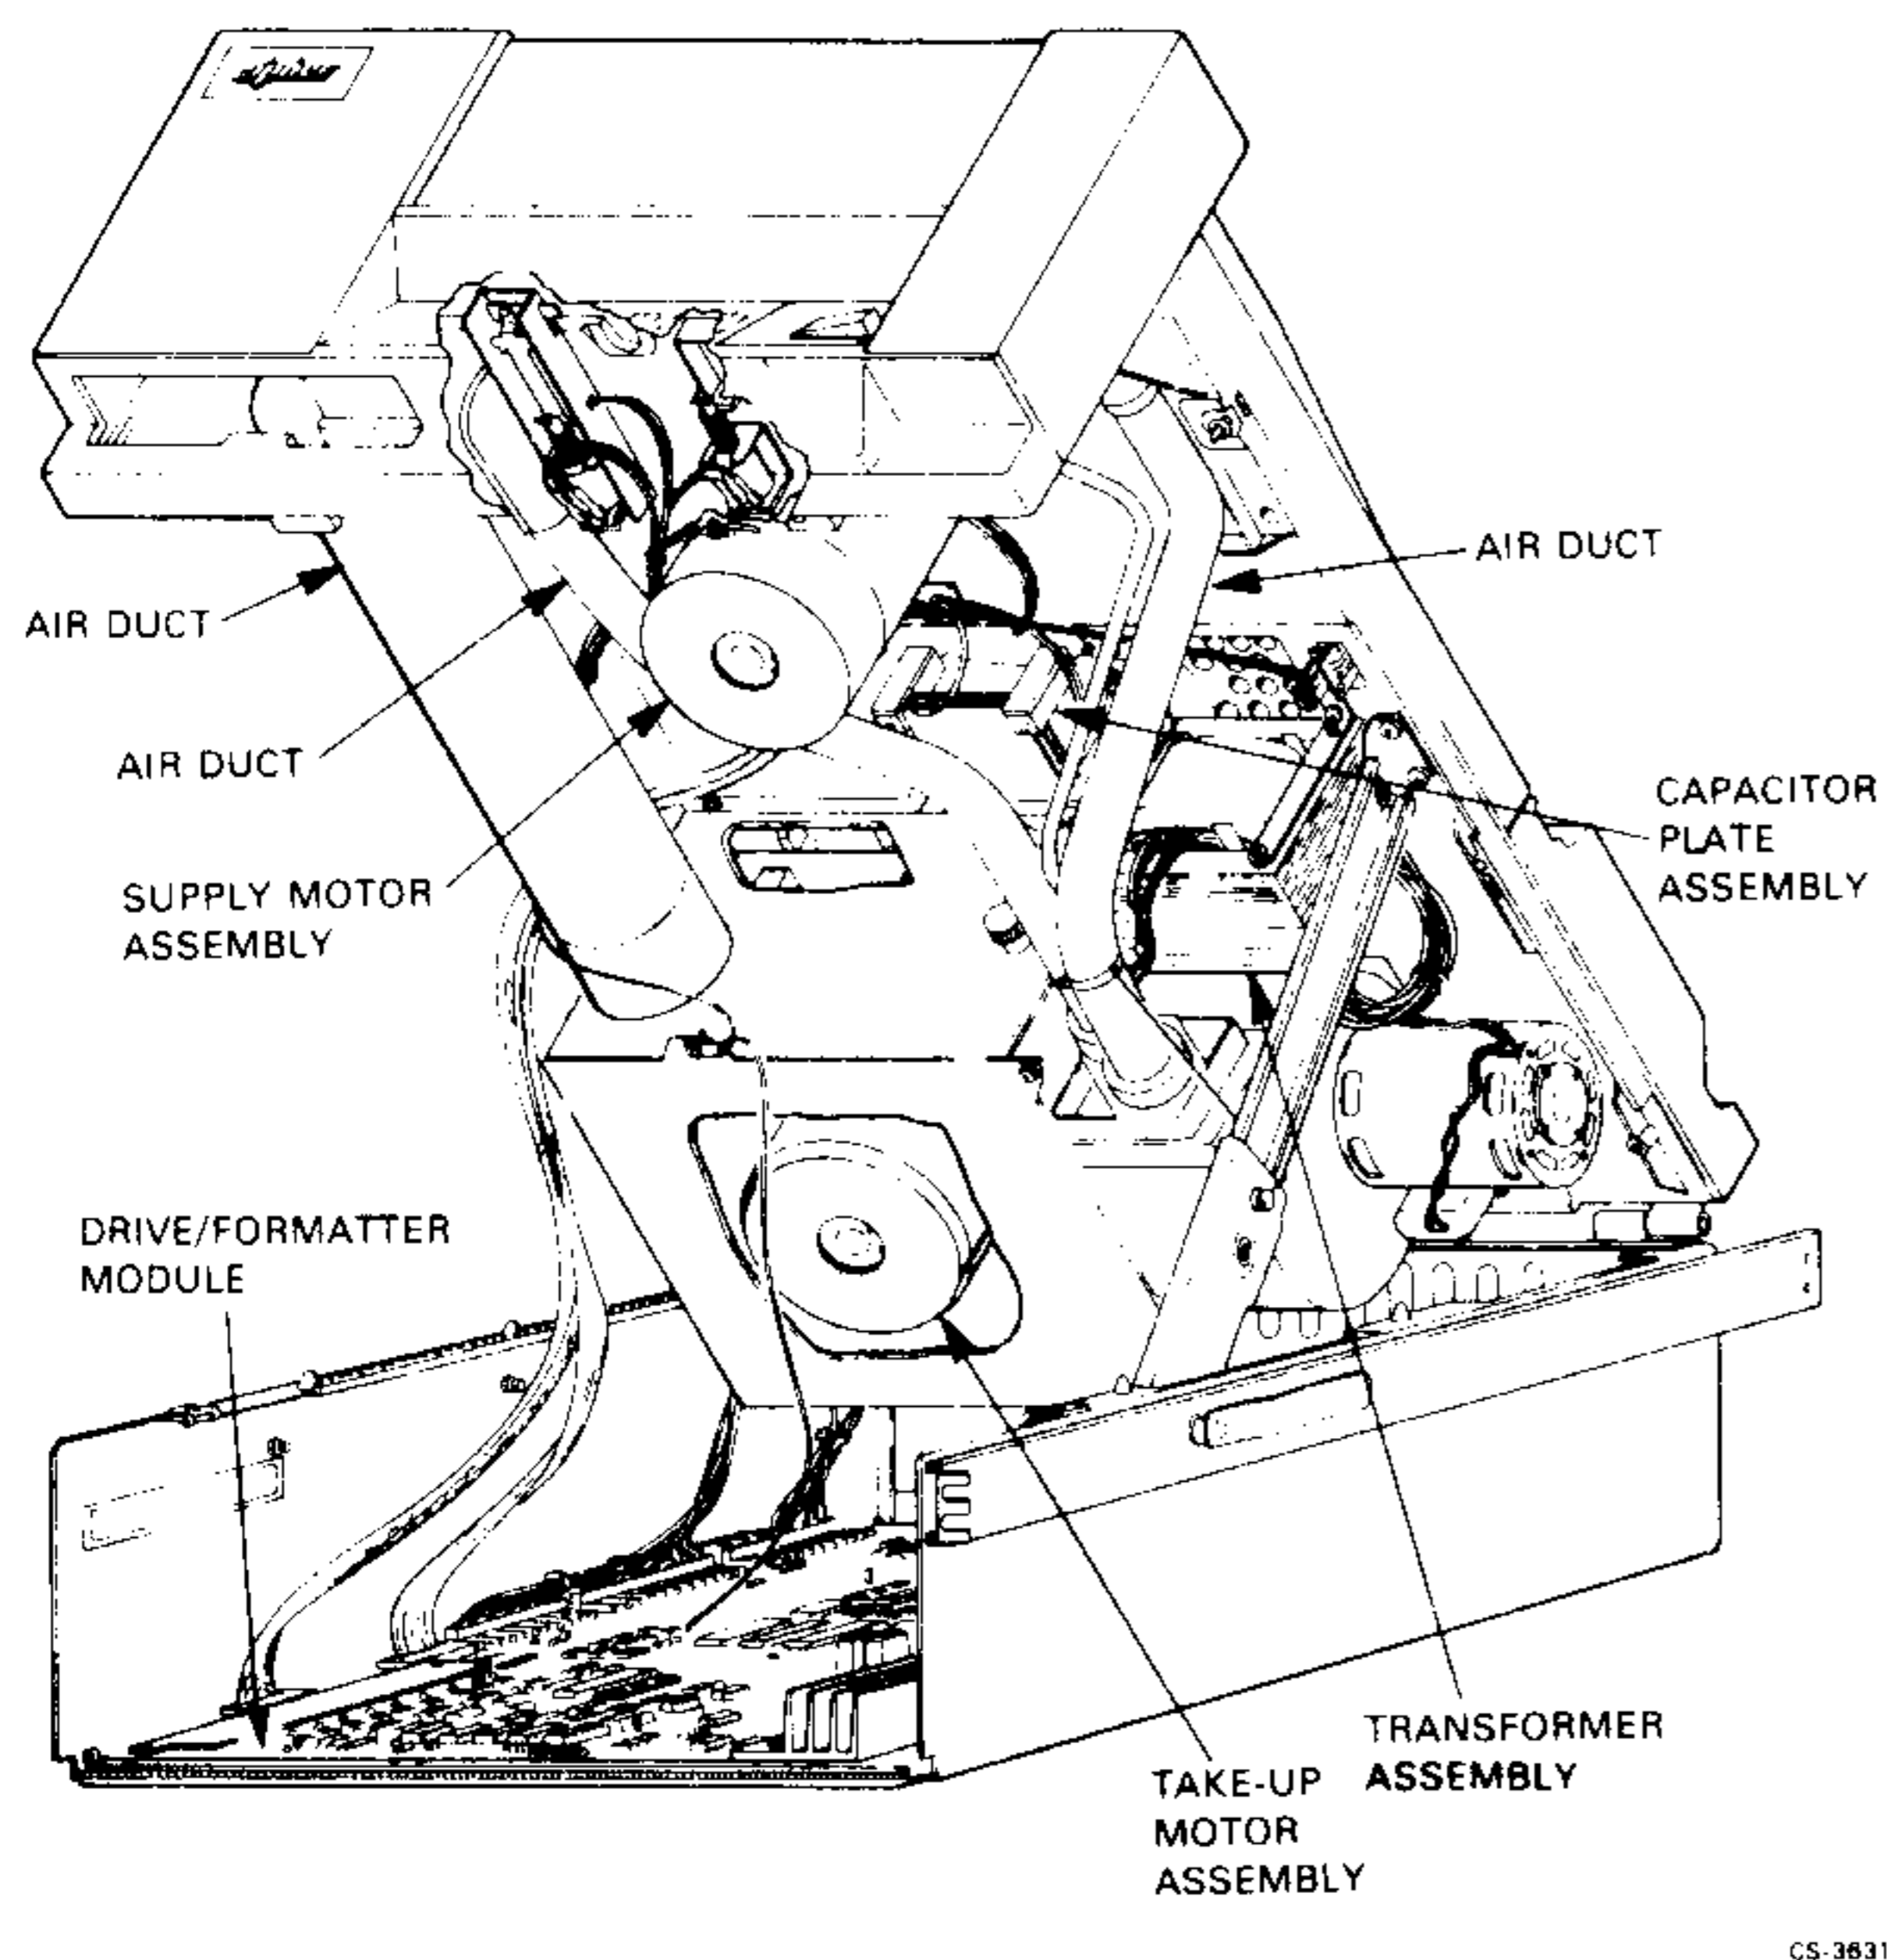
Bottom Plate Assembly (Diecast Unit Only)
